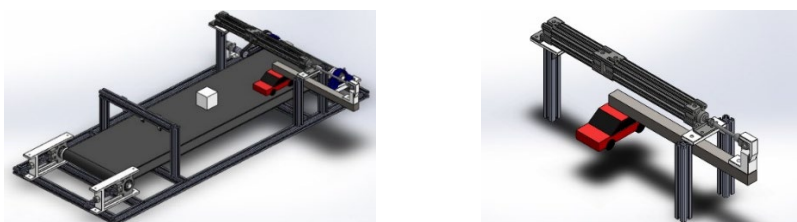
Final assembly of the manipulator with the flexible gripper.
